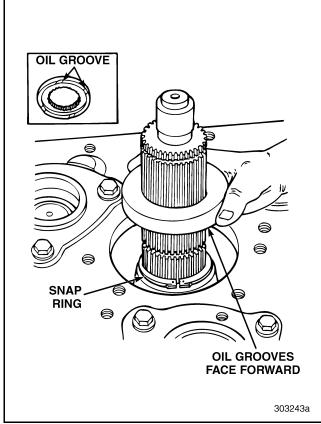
Removing Front Mainshaft Spacer and Snap Ring (T313L/T318L Shown)
